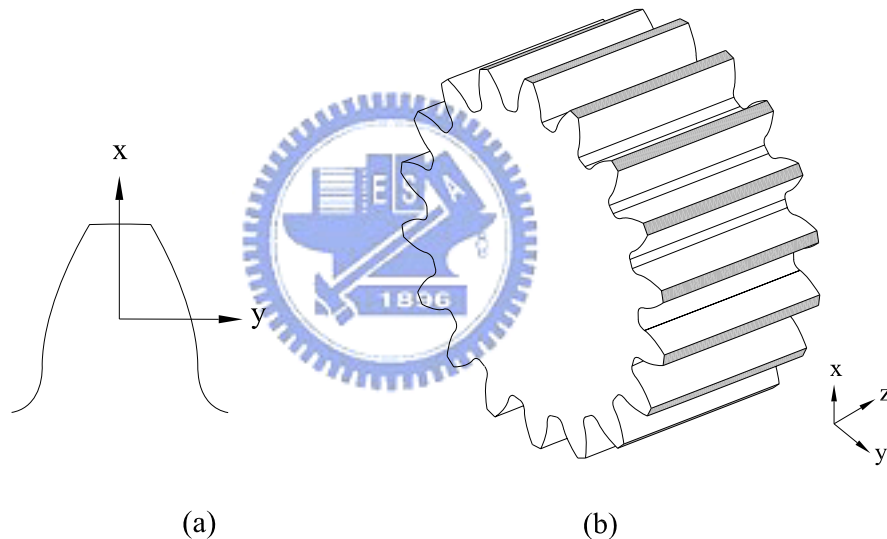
Schema of gear profile and gear tooth trace of a spur gear
